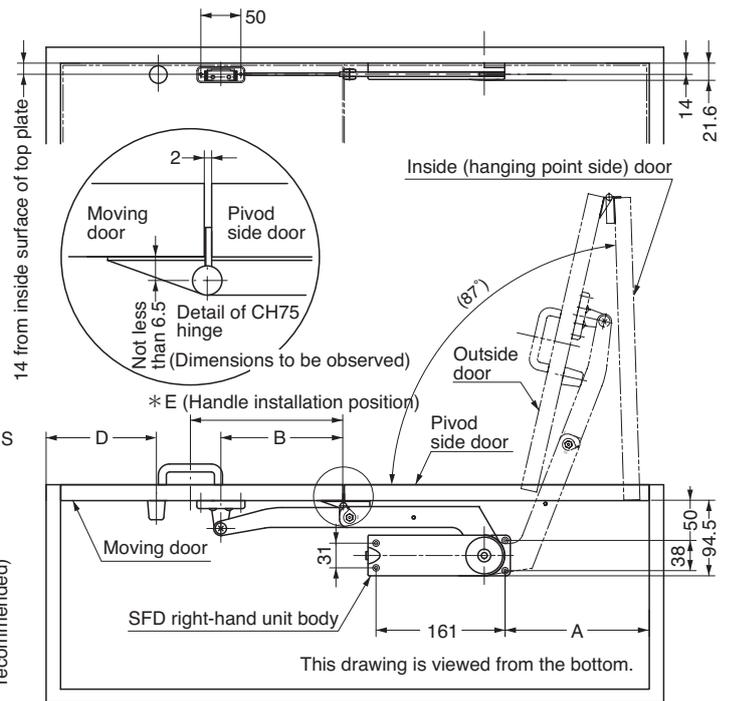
Mounting dimensions for inset specification (for right-hand side)
